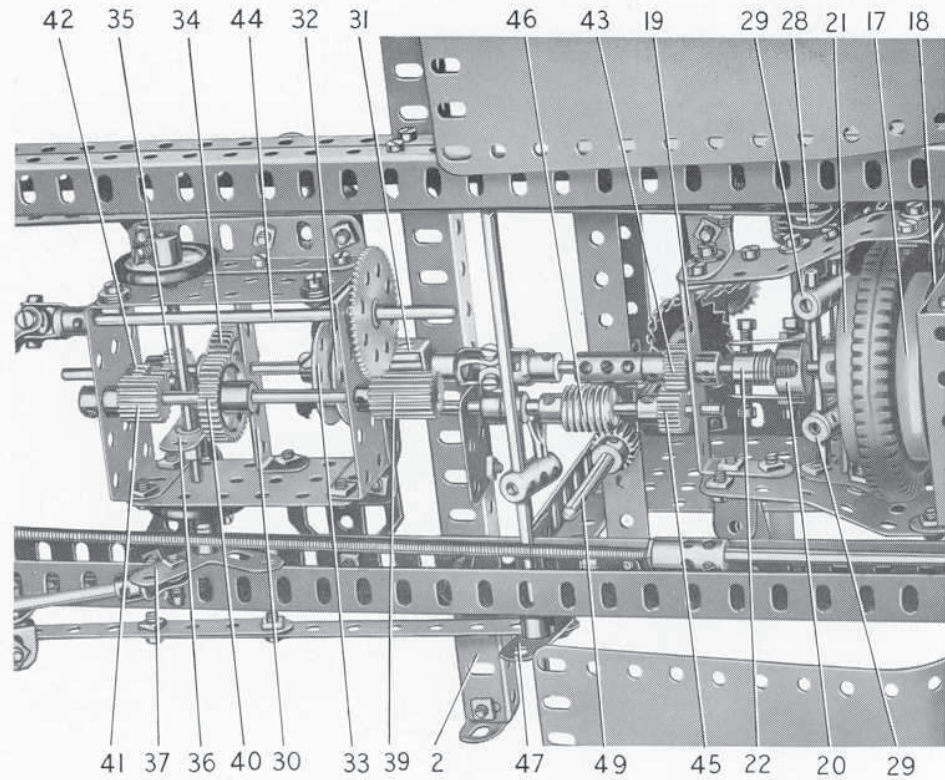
A close-up of the clutch and gear-box mechanisms of the Snow Loader
